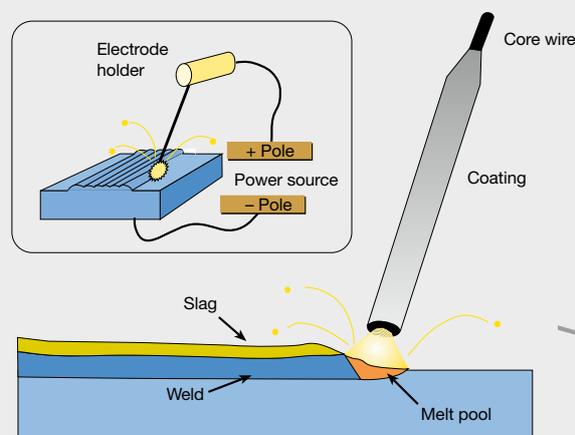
Shielded Metal-Arc Welding SMAW (MMA)
